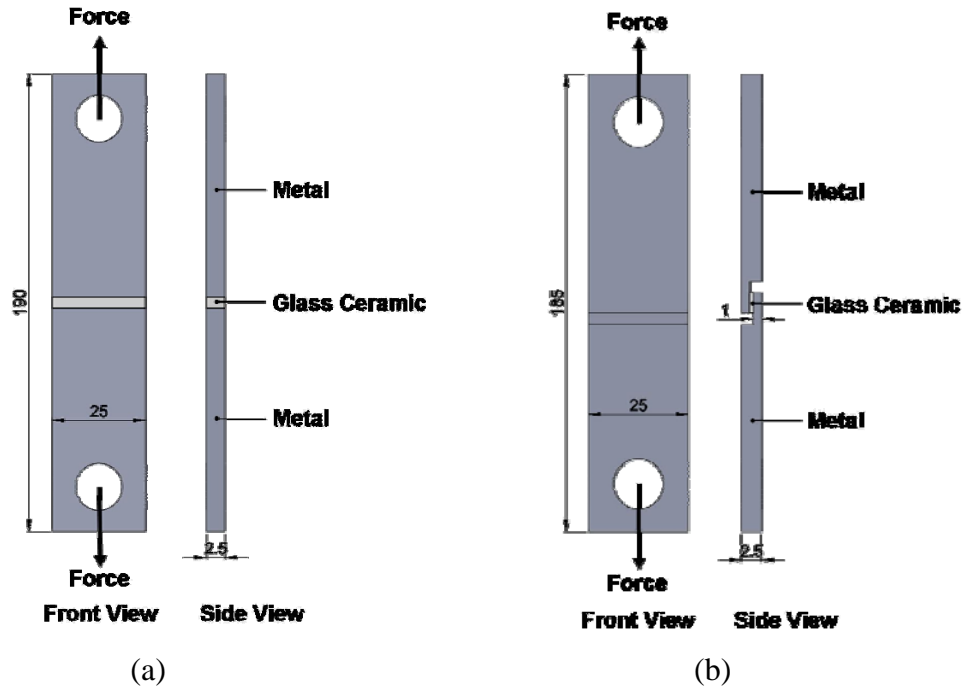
Scheme of two types of joint specimens: (a) tensile specimen and (b) shear specimen. (Dimensions: mm)
